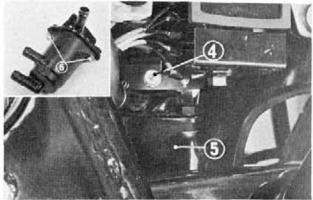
4 Breather element case mounting bolt 5 Breather element case 6 Screws
